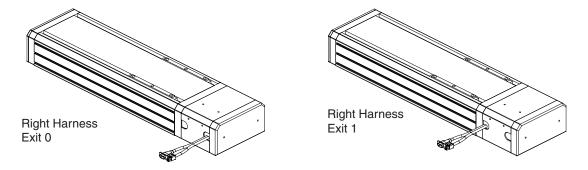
In-Line Motor, Right Harness Exit Locations
